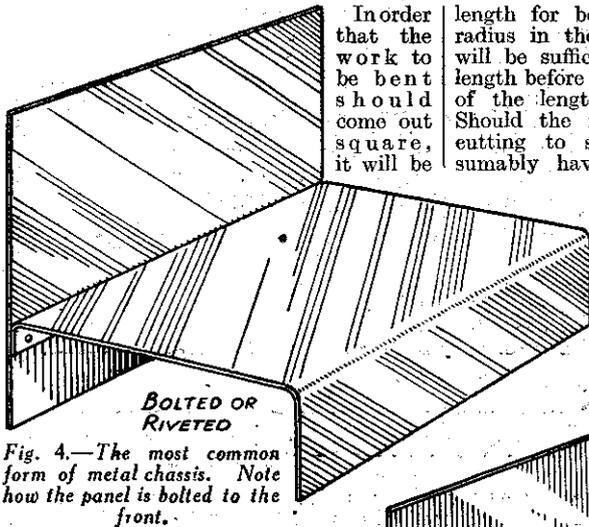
The most common form of metal chassis. Note how the panel is bolted to the front.
